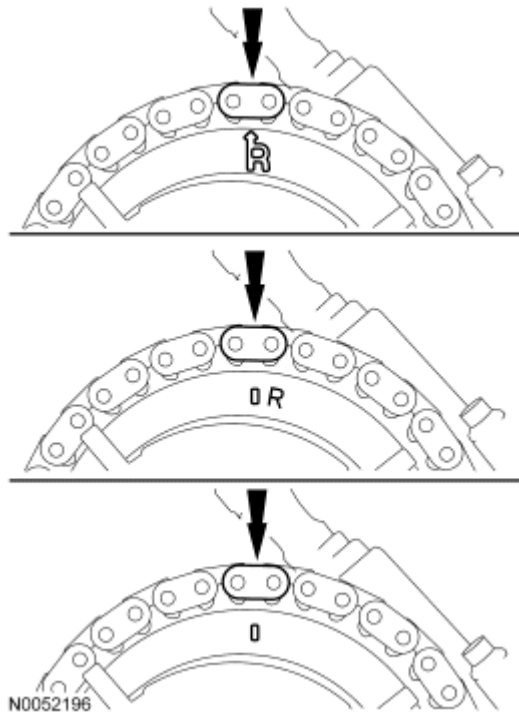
Locating Camshaft Sprocket Timing Mark Aligned With Copper Chain Link
